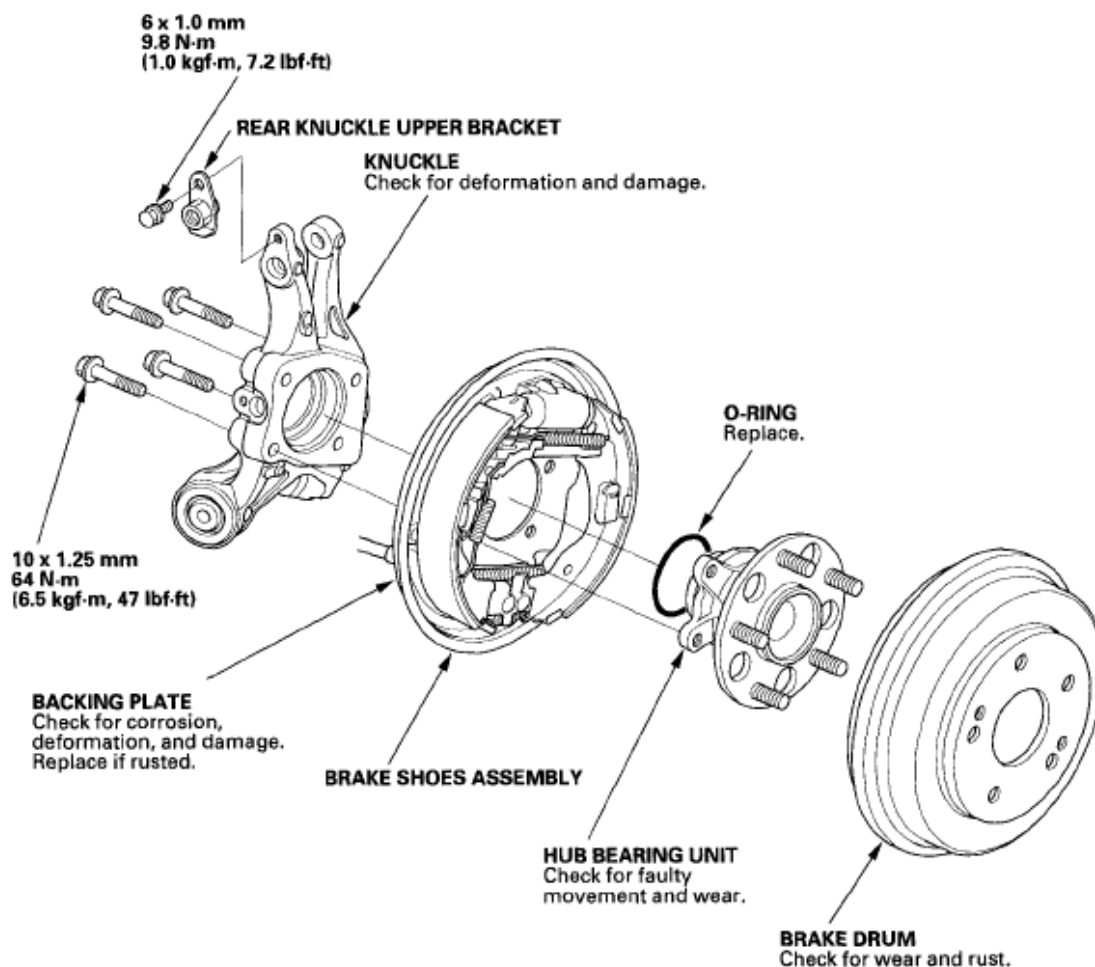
Exploded View Of Drum Brake Type (With Torque Specifications)
